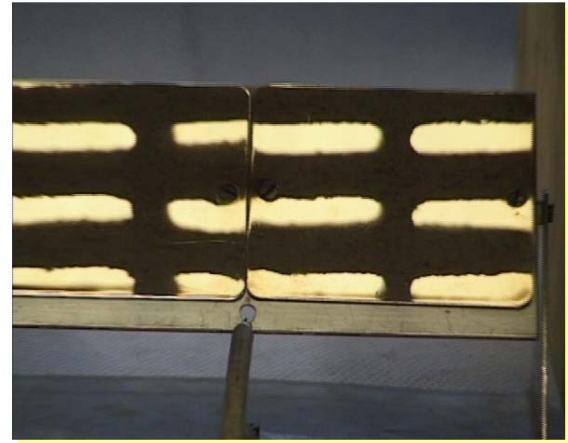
Application of Prototype 1 inspection system with incidence of daylight through a cold test checker brick
